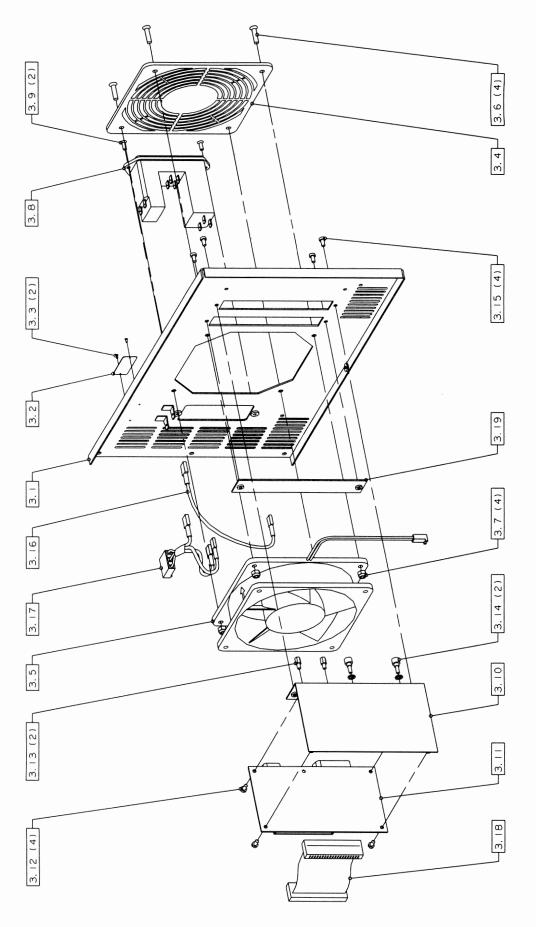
9320 REAR PANEL EXPLODED VIEW
